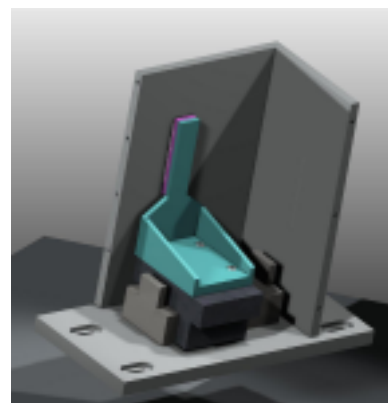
Sketch of the fast shutter, parts of the housing are not shown.
